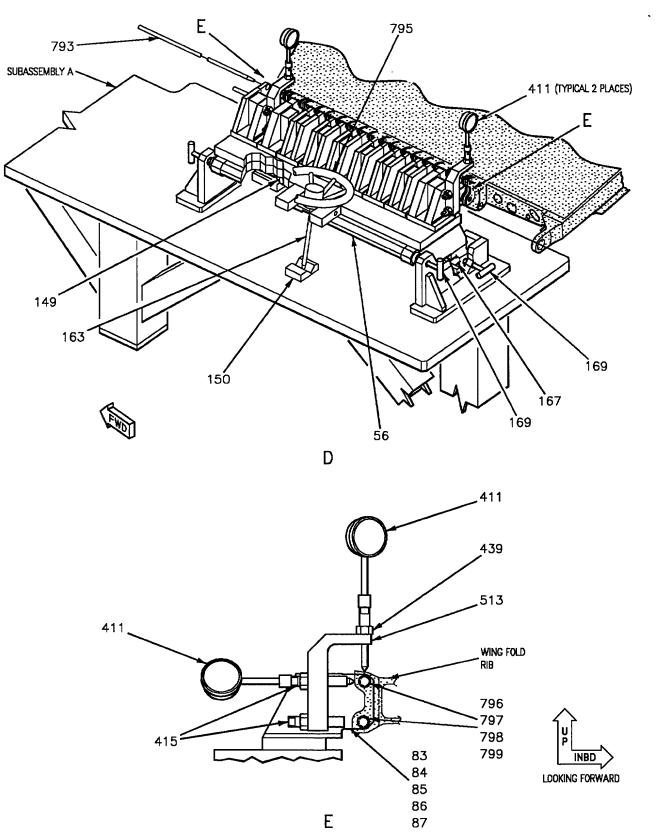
Inner Wing Attach Lugs (Sheet 3)
